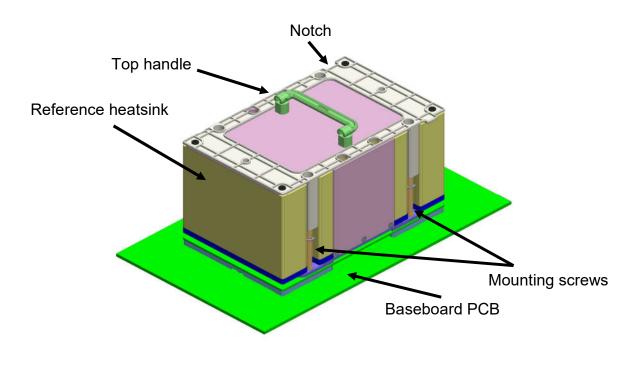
Reference Model of Heatsink with Accelerator Module Assembly
